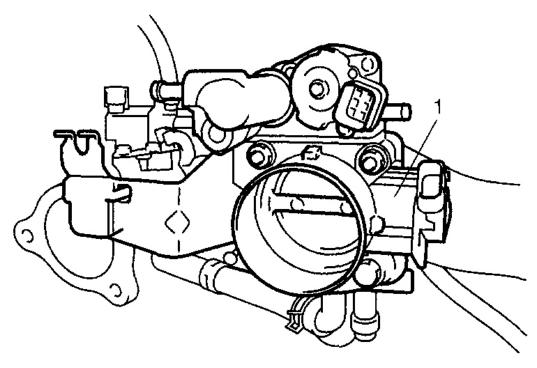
Removing Throttle Body & Intake Collector Courtesy of SUZUKI OF AMERICA CORP.
